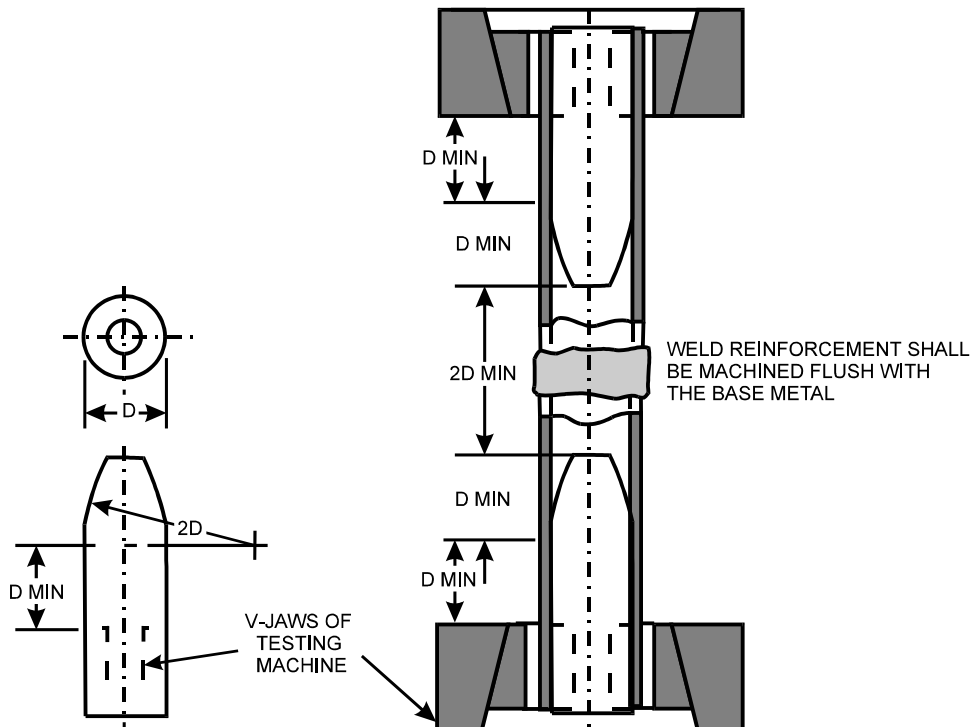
Full Section Tension Specimens — Small Diameter Pipe [3 in. Diameter or Less] (see 5.9.1.3)
